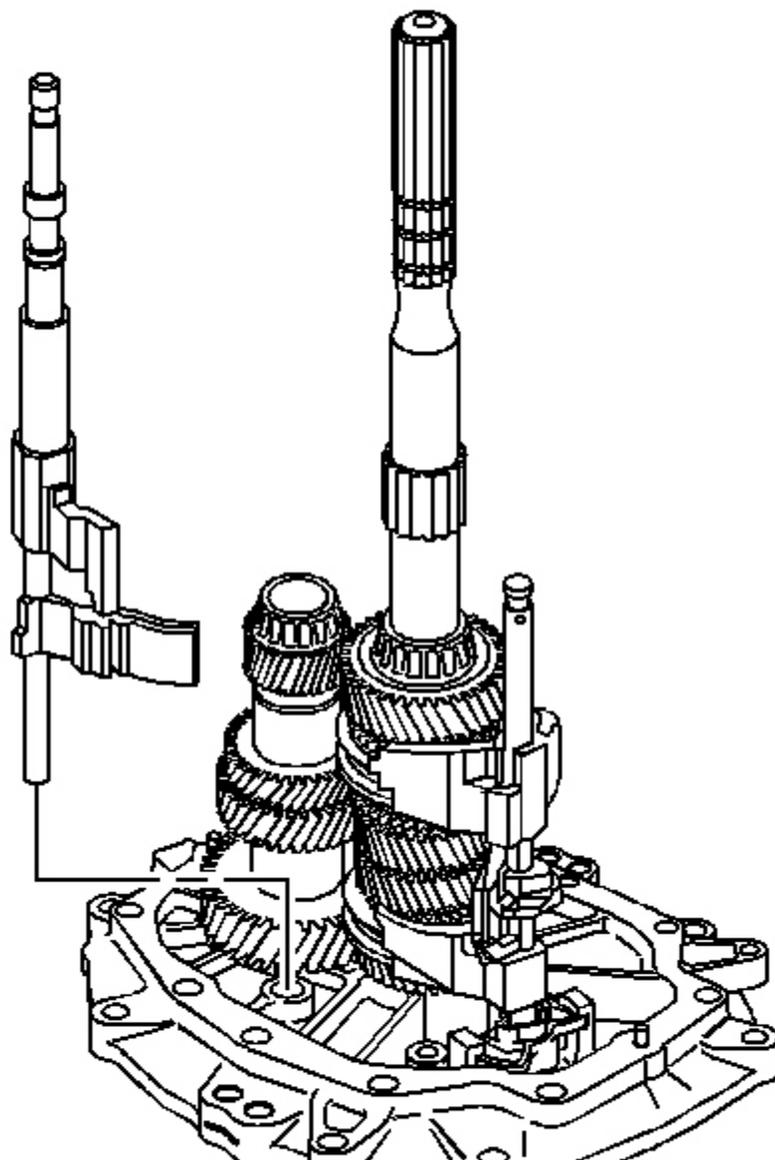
View Of 5th/6th & Reverse Shift Shaft
